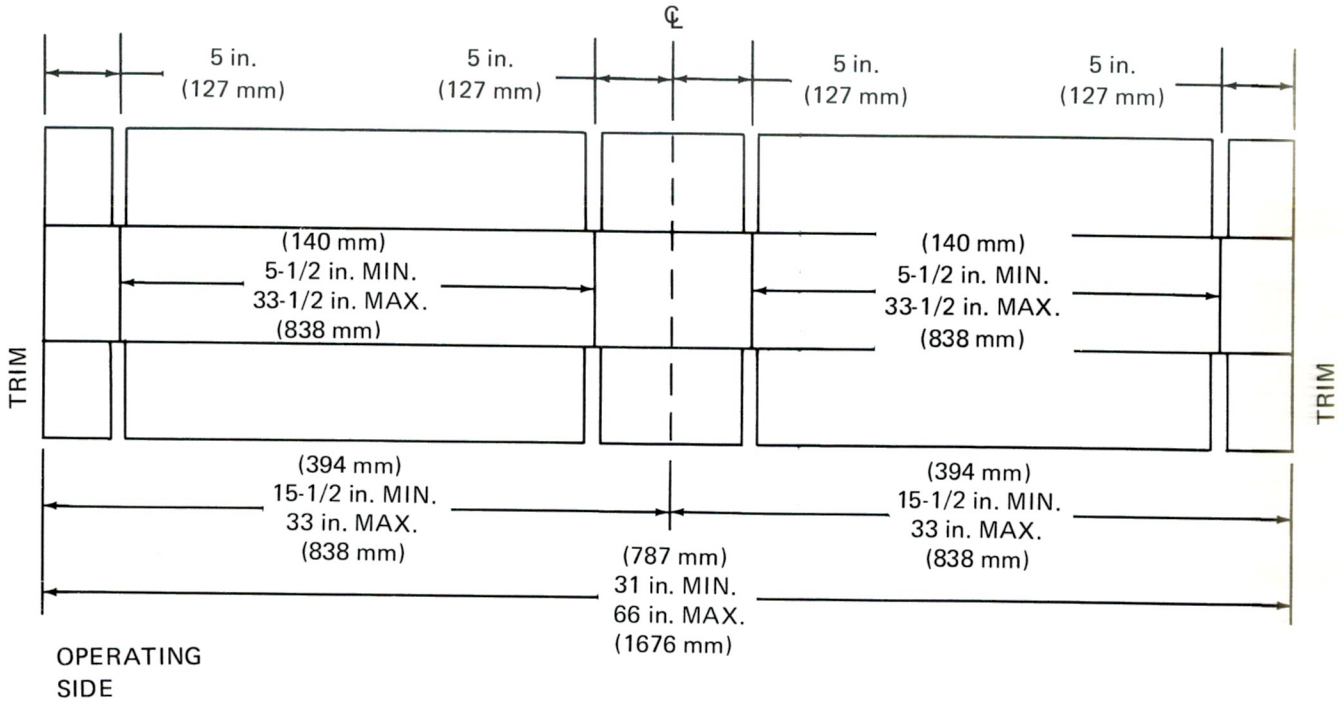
5 in. (127 mm) END PANEL WITH TRIM
